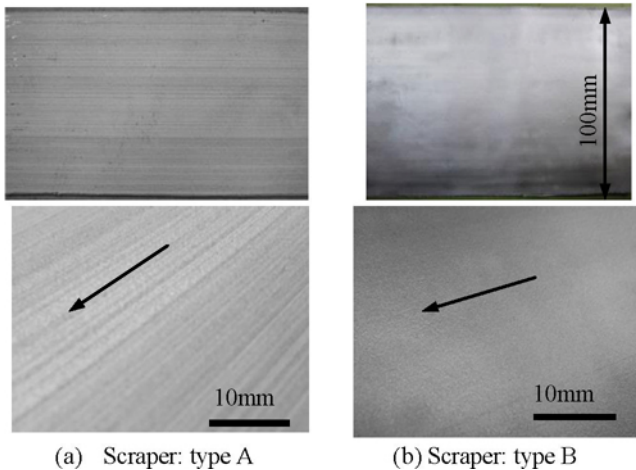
Photograph of the scribed surfaces of the strip cast by the type A scraper and type B scraper. Arrows show casting direction.
